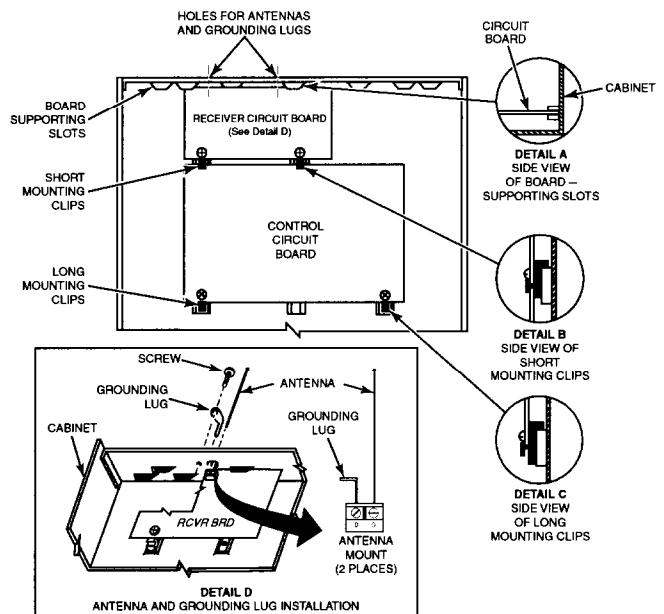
Installing the 5883 Board in the Control's Cabinet (Check the control's Installation Instructions for applicability)
